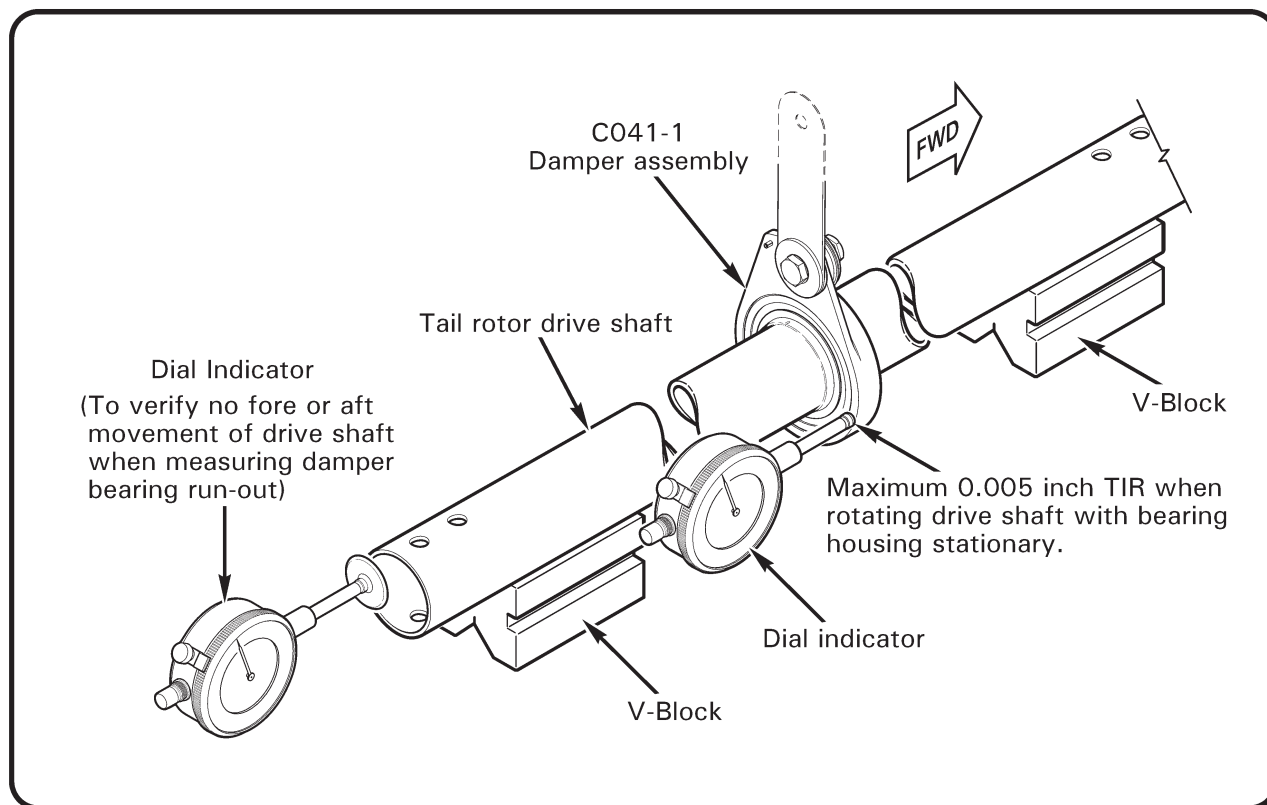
C DAMPER BEARING RUN-OUT INSPECTION
